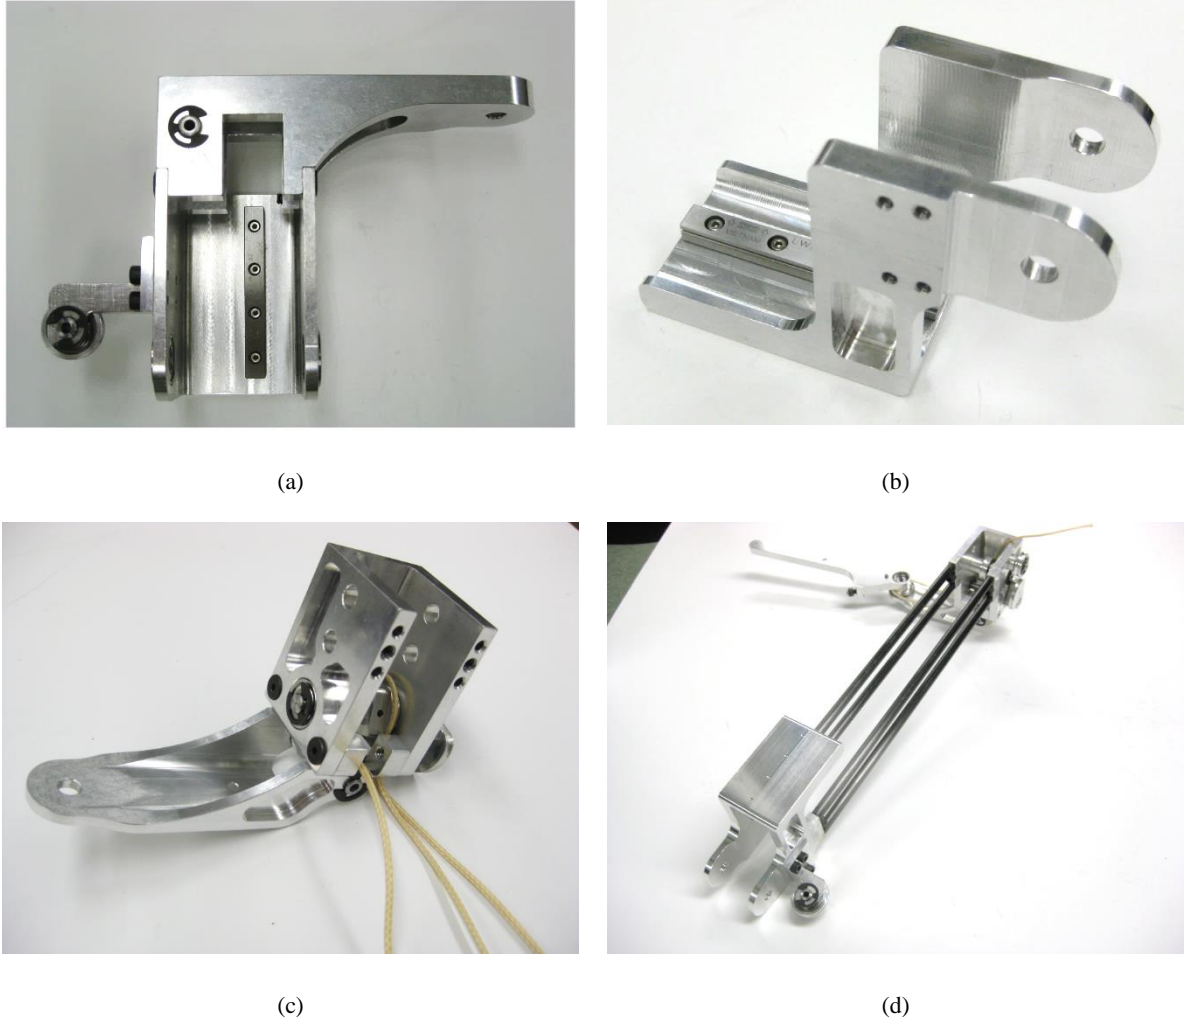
The various links designed to allow clearance for internal mechanisms. (a) The link placed next to the shoulder. The guide rail would be oriented vertically. Attached to this rail would be the idler pulley for the drive rope of the spring cam. (b) The most proximal piece of the upper arm link. The guide rail would be oriented parallel to the centerline of the upper arm. Attached to this rail would be the spring cam mechanism. (c) The most distal piece of the upper arm link. This piece wraps underneath the elbow. (d) The two ends of the upper arm link from (b) and (c) connected by the carbon fiber rod structure. The forearm link is also shown attached in this picture.
